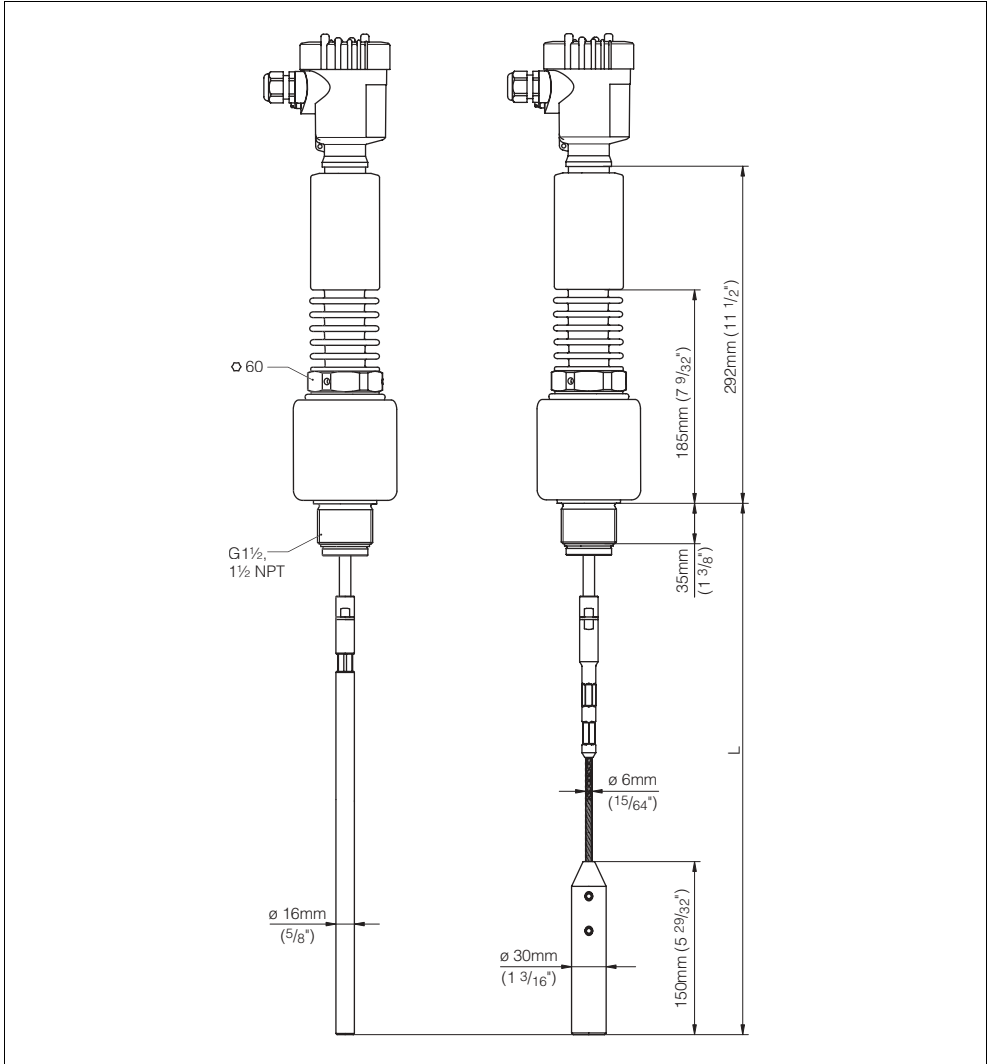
KSR-GT 666 (-200° ... +400°C) - cable, rod version with thread
